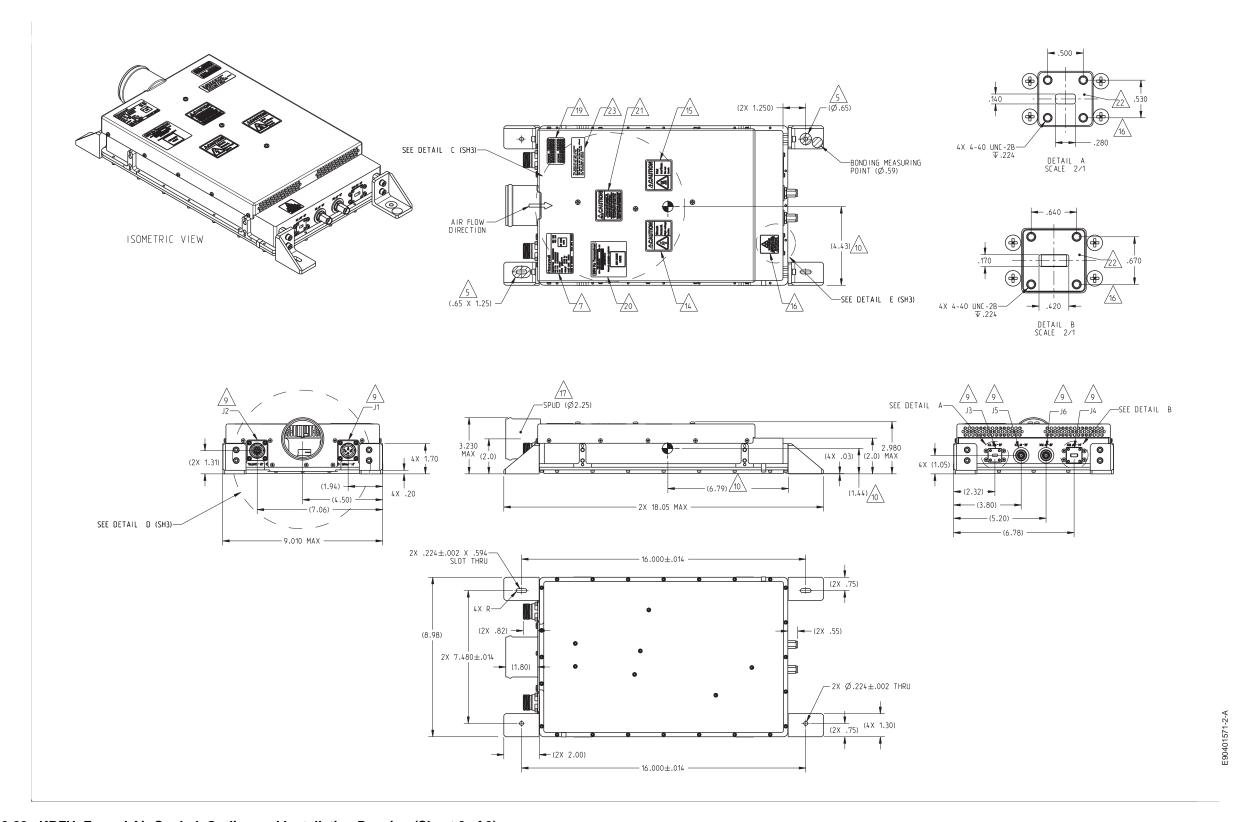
KRFU, Forced Air Cooled, Outline and Installation Drawing (Sheet 2 of 3)
